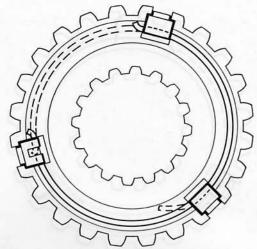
Location of the sliding key springs in the first speed clutch and reverse gear hub, viewed from the rear of the hub. The front spring shown dotted has the turnedout end engaged in the slotted key
